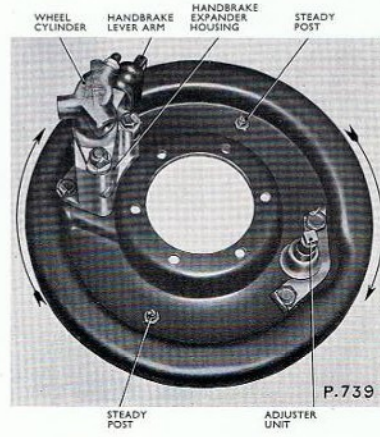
Rear view of the KAL.30 and KA.40/60 left hand (near-side) rear brake assembly. Arrows indicate the direction of drum rotation
